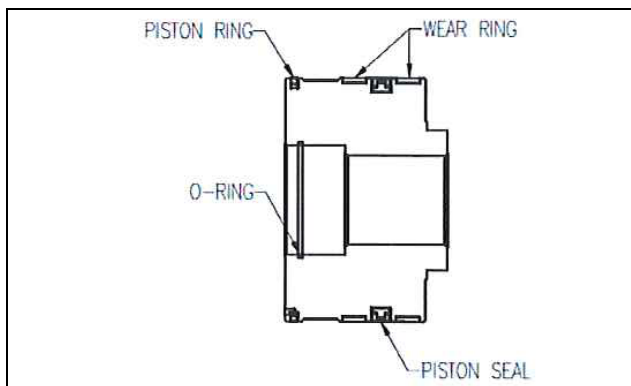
Piston Seal Removal (Main Boom Lift Cylinder)
